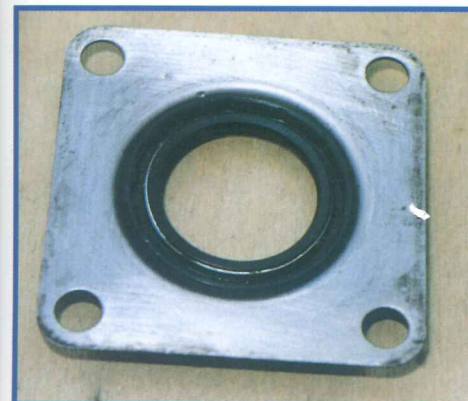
Fit a new oiled seal into the seal housing such that the retaining spring is visible.
